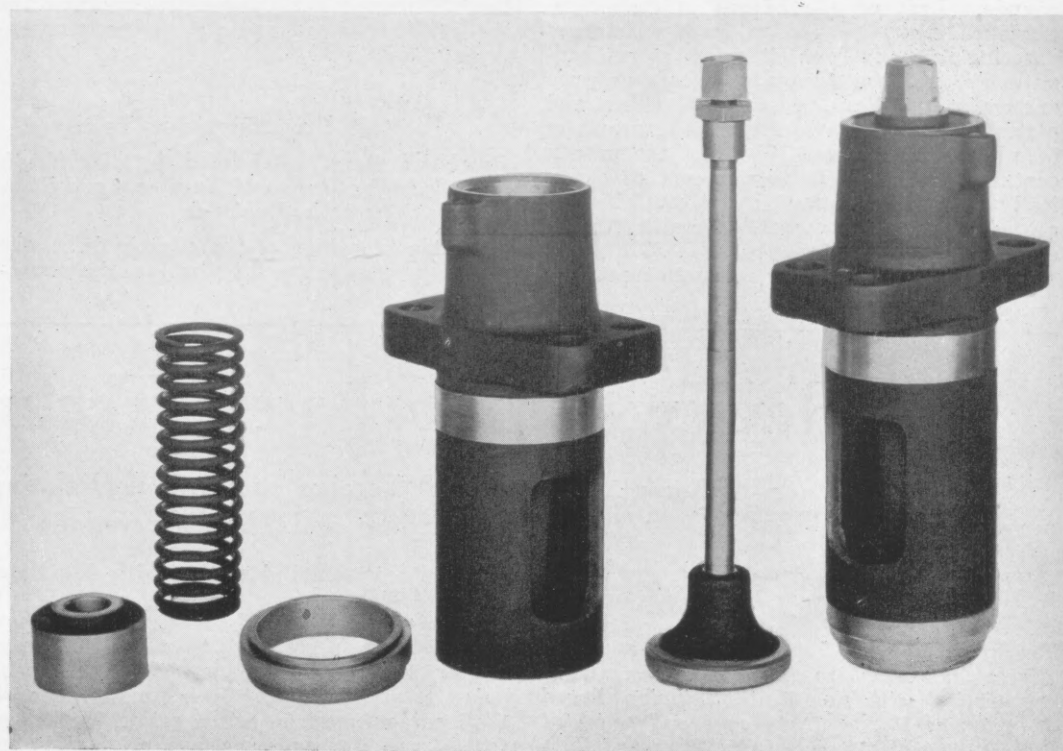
Exhaust valve parts and assembly showing the characteristic poppet type
